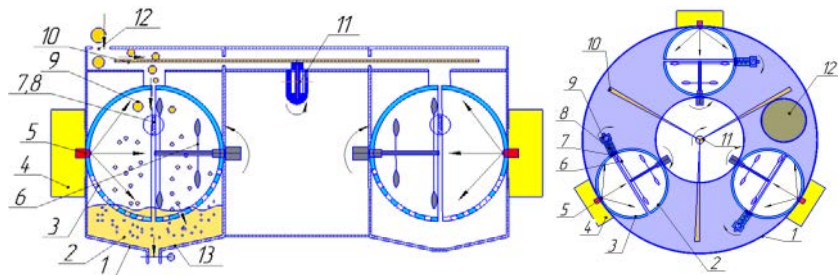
Installation for fat melting; 1: shielding enclosure; 2: first perforated hemisphere, 3: second perforated hemisphere; 4: microwave generator unit; 5: magnetron radiator; 6: agitating mechanism with electric motor; 7: grinding mechanism (knives and grills); 8: discharge auger; 9: suction intake; 10, 11: scrapers with the electric motor for moving raw materials; 12: second torus with rectangular cross section and loading hatch; 13: storage trough with a drain pipe and valve
